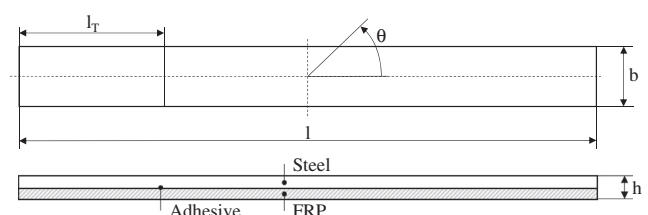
Specimen design for the tensile and 3-point-bending tests.
